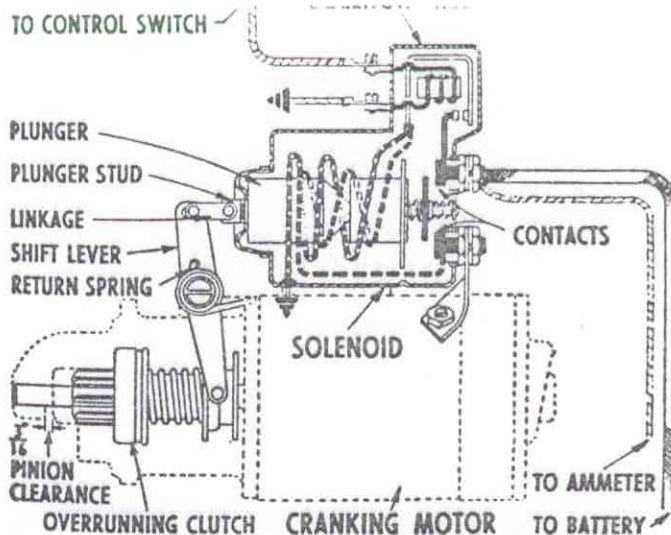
Overrunning clutch motor equipped with adjustable plunger stud for adjusting pinion clearance (see Fig. 27)
